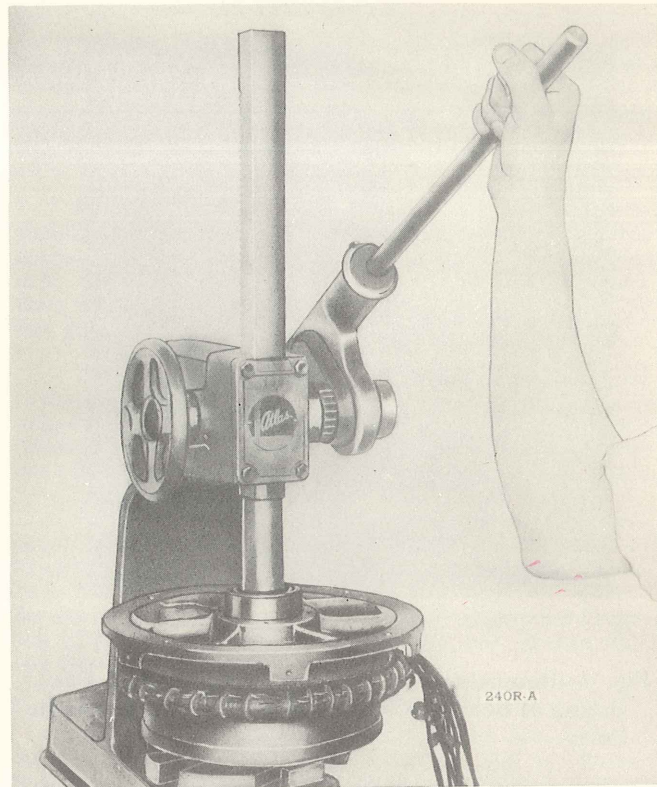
Pressing the Stator Bearing into the Stator. Hollow Sleeve On Shaft Engages the Inner Race of the Bearing
